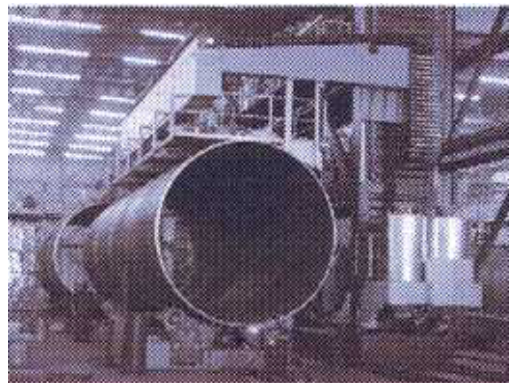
Circumferential welding of monopiles (SAW, 3-wire; foot: SIF group)
